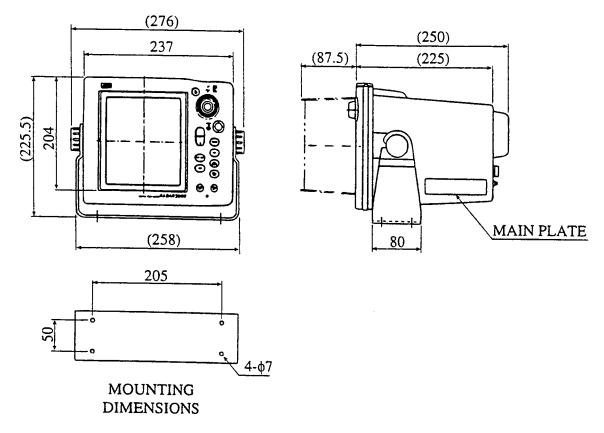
DISPLAY MOUNTING DIMENSIONS
